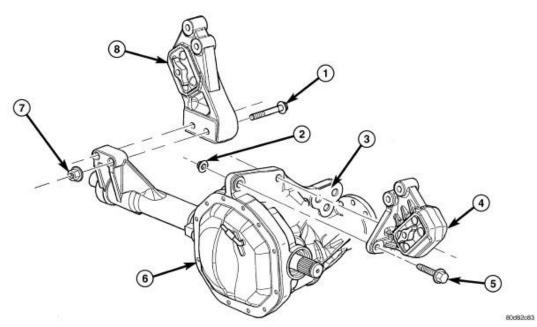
ENGINE INSULATOR MOUNTS 4X4 Courtesy of CHRYSLER LLC
